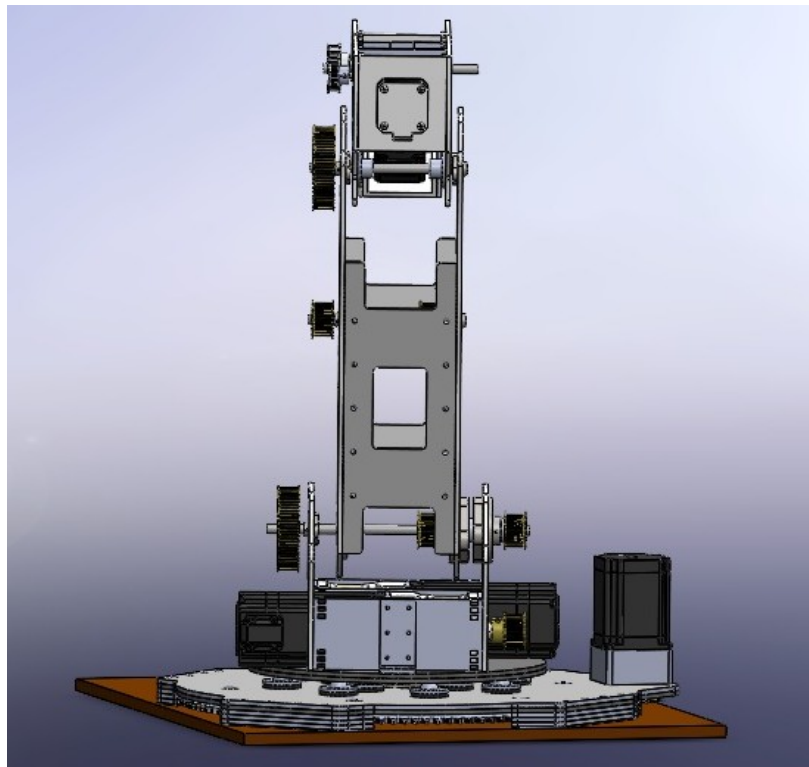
Rear elevation in a fully raised pose, showing the added structural integrity supports bracing the shoulder link plates, and the finalized base assembly at the bottom of the stack.
